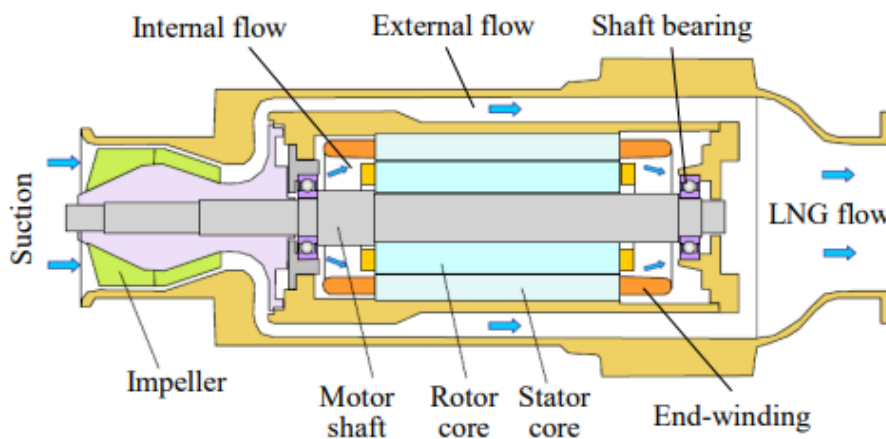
Submerged pump assembly for LNG applications using a cryogenic-cooled induction machine
